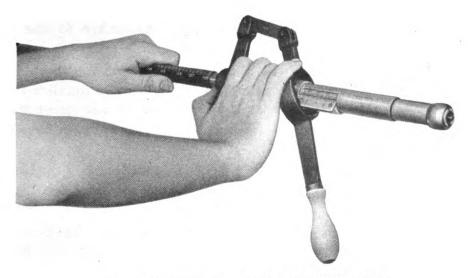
Assembling Head Tube and Extension Staff (2-inch Star Gage)
